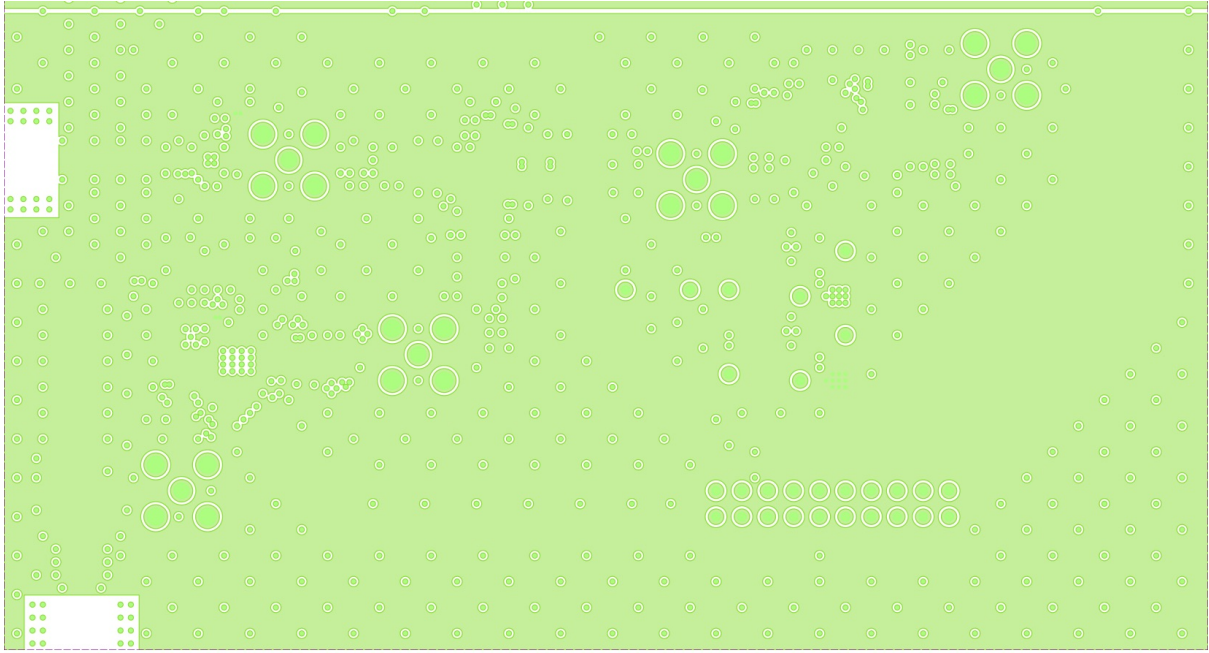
DLL-HPC received signal beamformer PCB layout for element 0 inner layer 2
